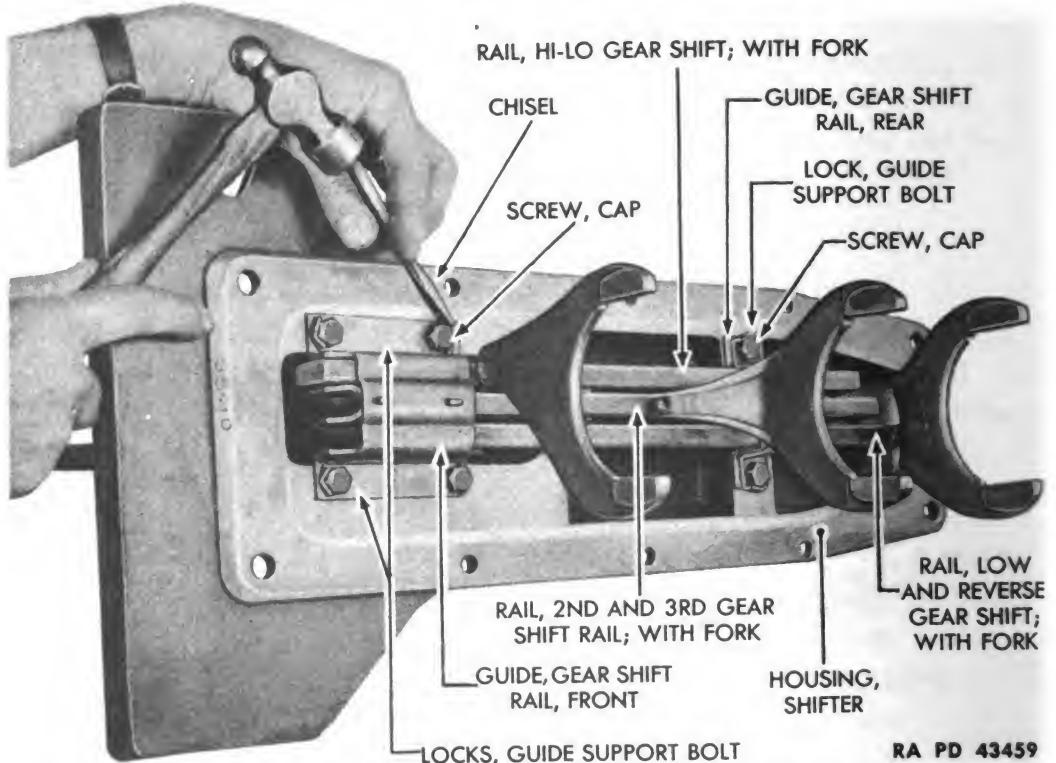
Removal of Guide Support Bolt Locks from Shifter Housing
